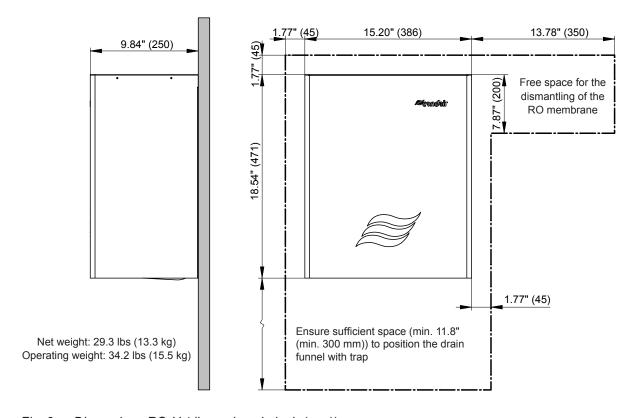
Dimensions RO-H (dimensions in inch (mm))
